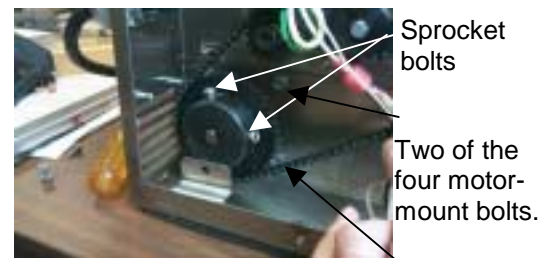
Two bolts hold the drive sprocket on the motor's drive shaft. When the sprocket is removed, the four machine bolts that hold the motor in place are accessible.
